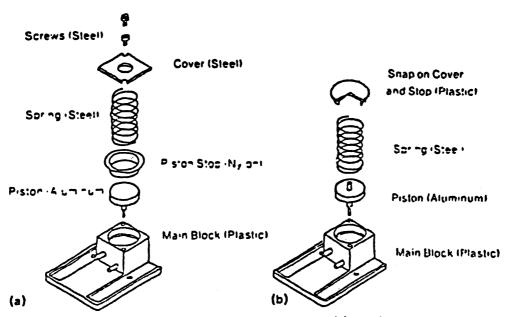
Pneumatic piston subassembly Current design (a) has 7 parts, the proposed design (b) has 4 parts.
